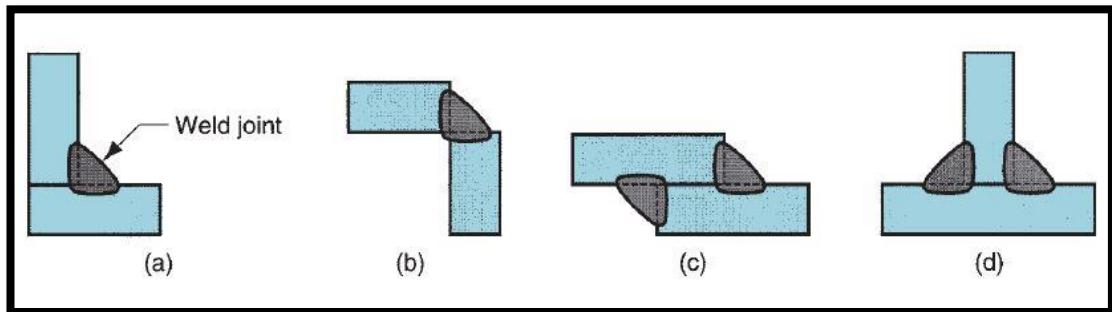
Various forms of fillet welds: (a) inside single fillet corner joint; (b) outside single fillet corner joint; (c) double fillet lap joint; and (d) double fillet tee joint. Dashed lines show the original part edges [17].
